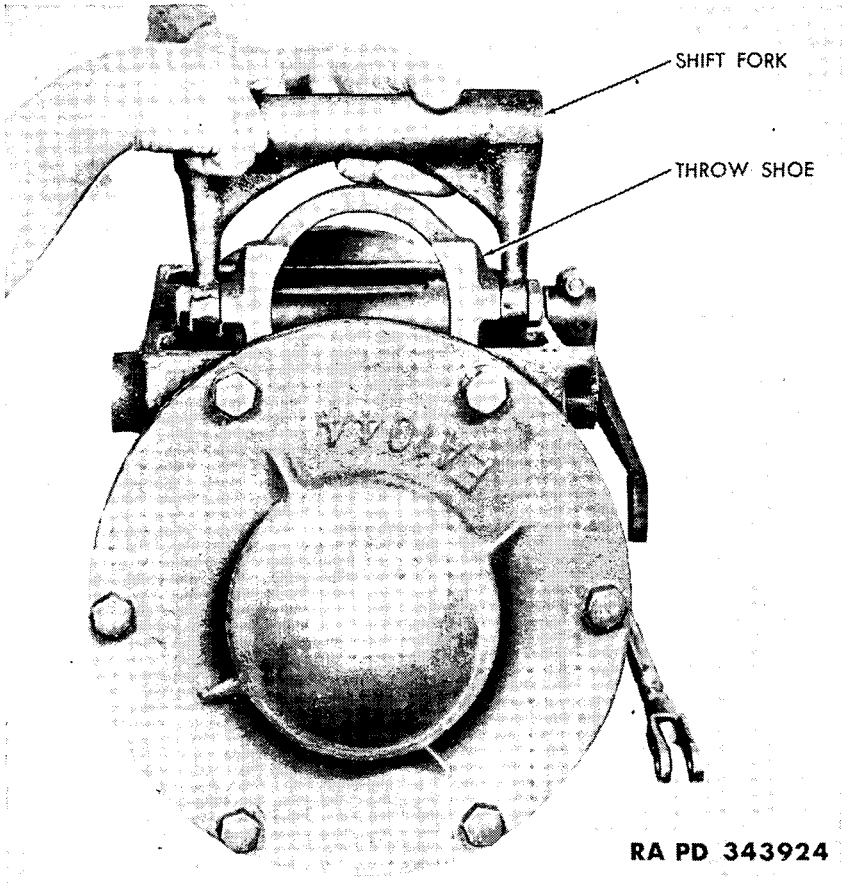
Removing Shift Fork and Throw Shoe Assembly
